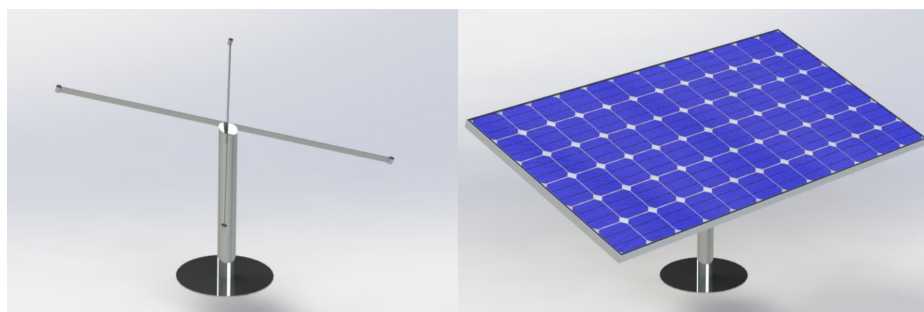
a) CAD rendering of Stainless-steel mounting structure; b) CAD rendering of solar panel mounted on the structure
